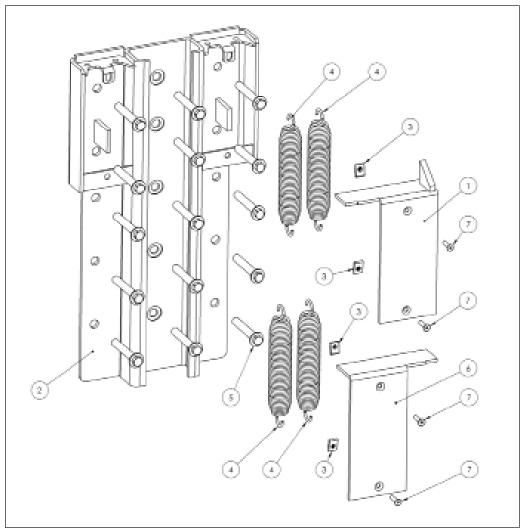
B—ROLLER TRACK ASSEMBLY
